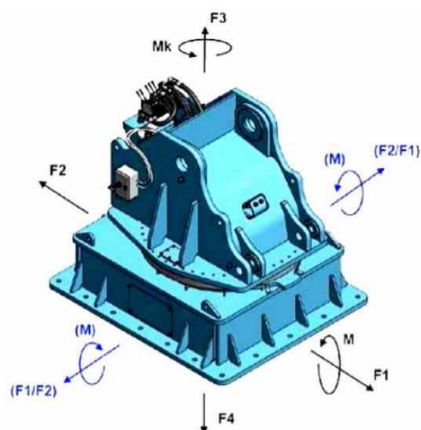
Scheme of load on the foundation of the hammer GR-158
